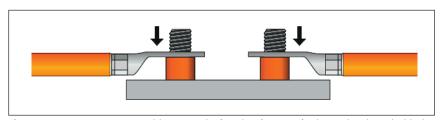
HV BM 1.2, power cables HV+, placing the ring terminals on the threaded bolts
